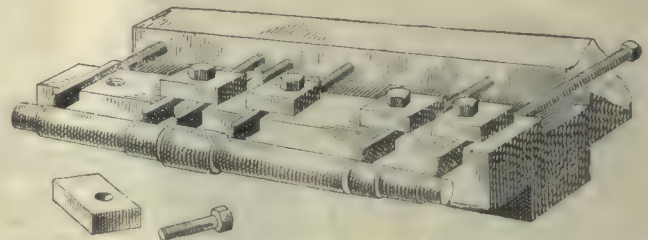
LAYOUT OF TOOLING—NICKING OPERATION
